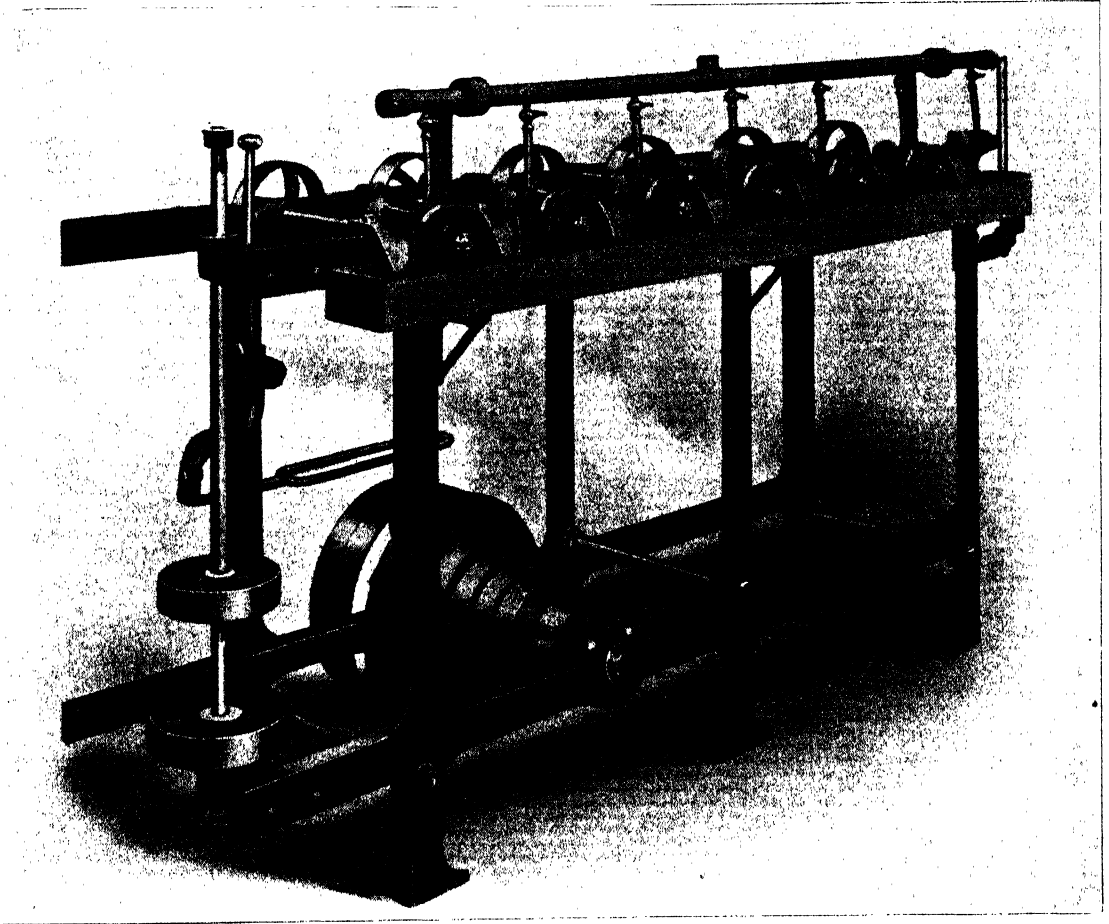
SEVEN-HOLE CONTINUOUS MACHINE—G. HATTERSLEY.
